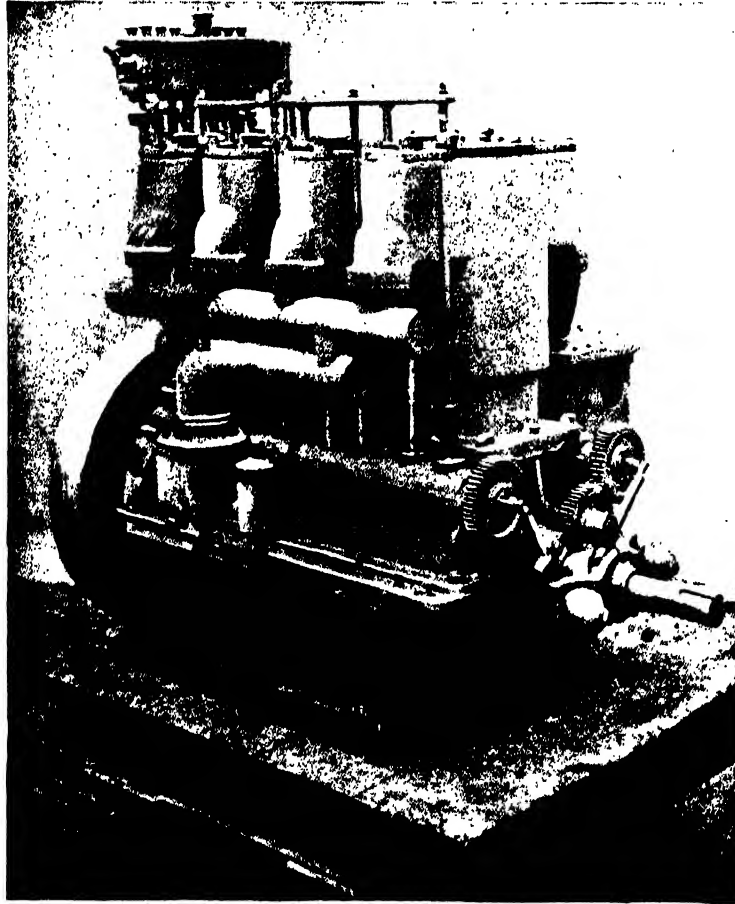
Forest Petrol Launch Engine. Inlet Valve Side
